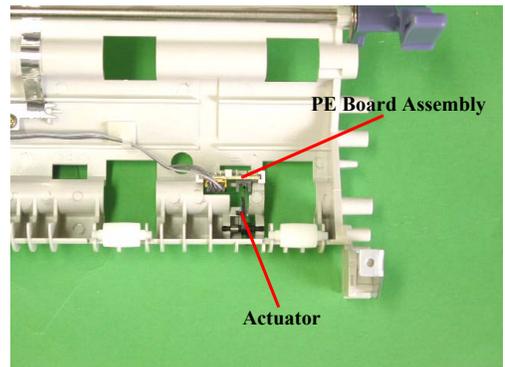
Removal of Actuator and PE Board Assembly 2
